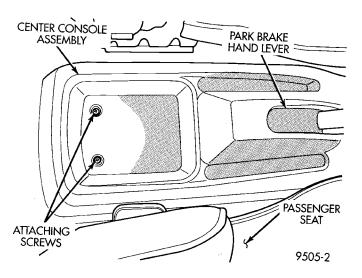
Attaching Screws At Rear Of Center Console W/O Arm Rest
